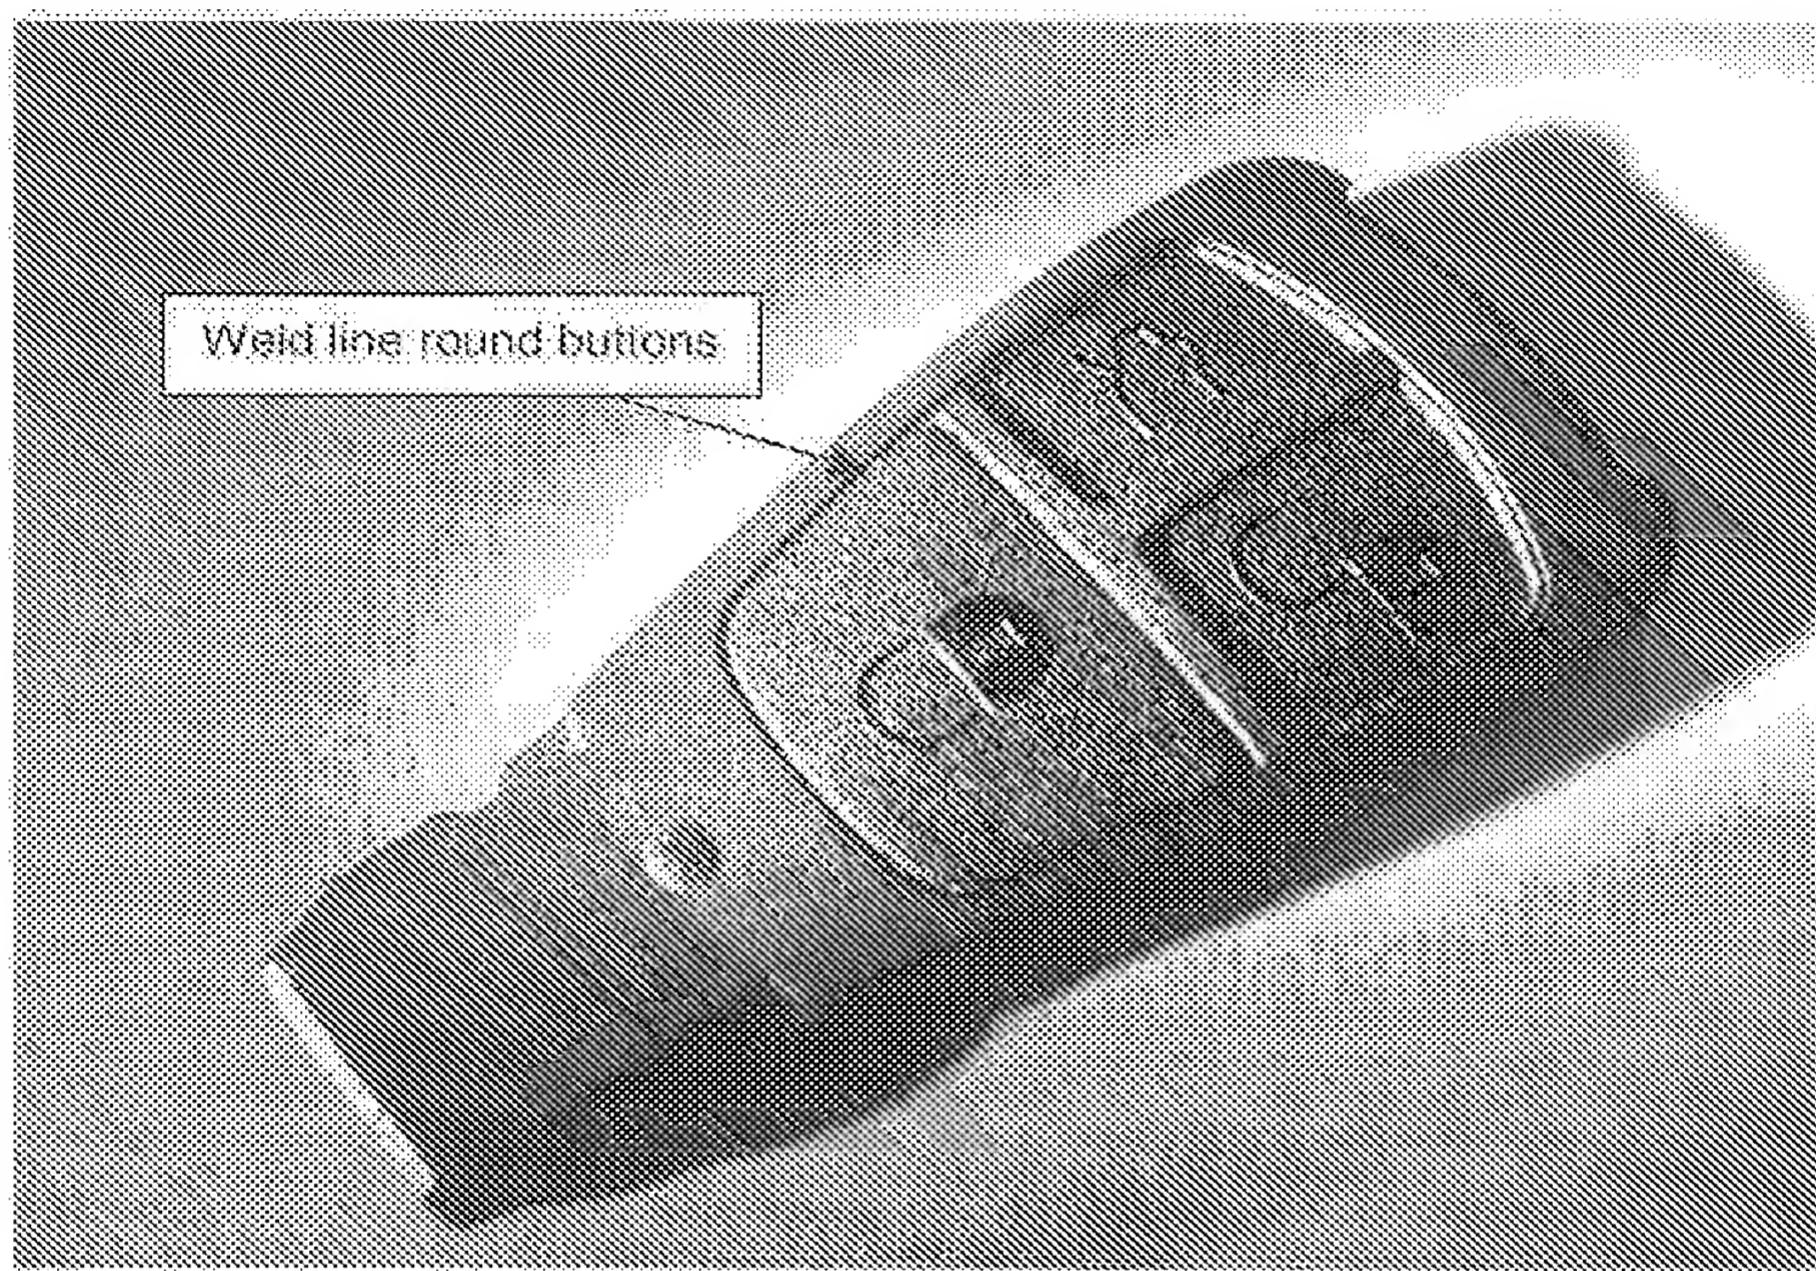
Parts welded with near-infrared absorbing colorant in one and transmissive black colorant in the other. The weld is round the buttons, both parts appear black to the eye, but one is transmissive to the near-infrared laser to allow welding through it.
